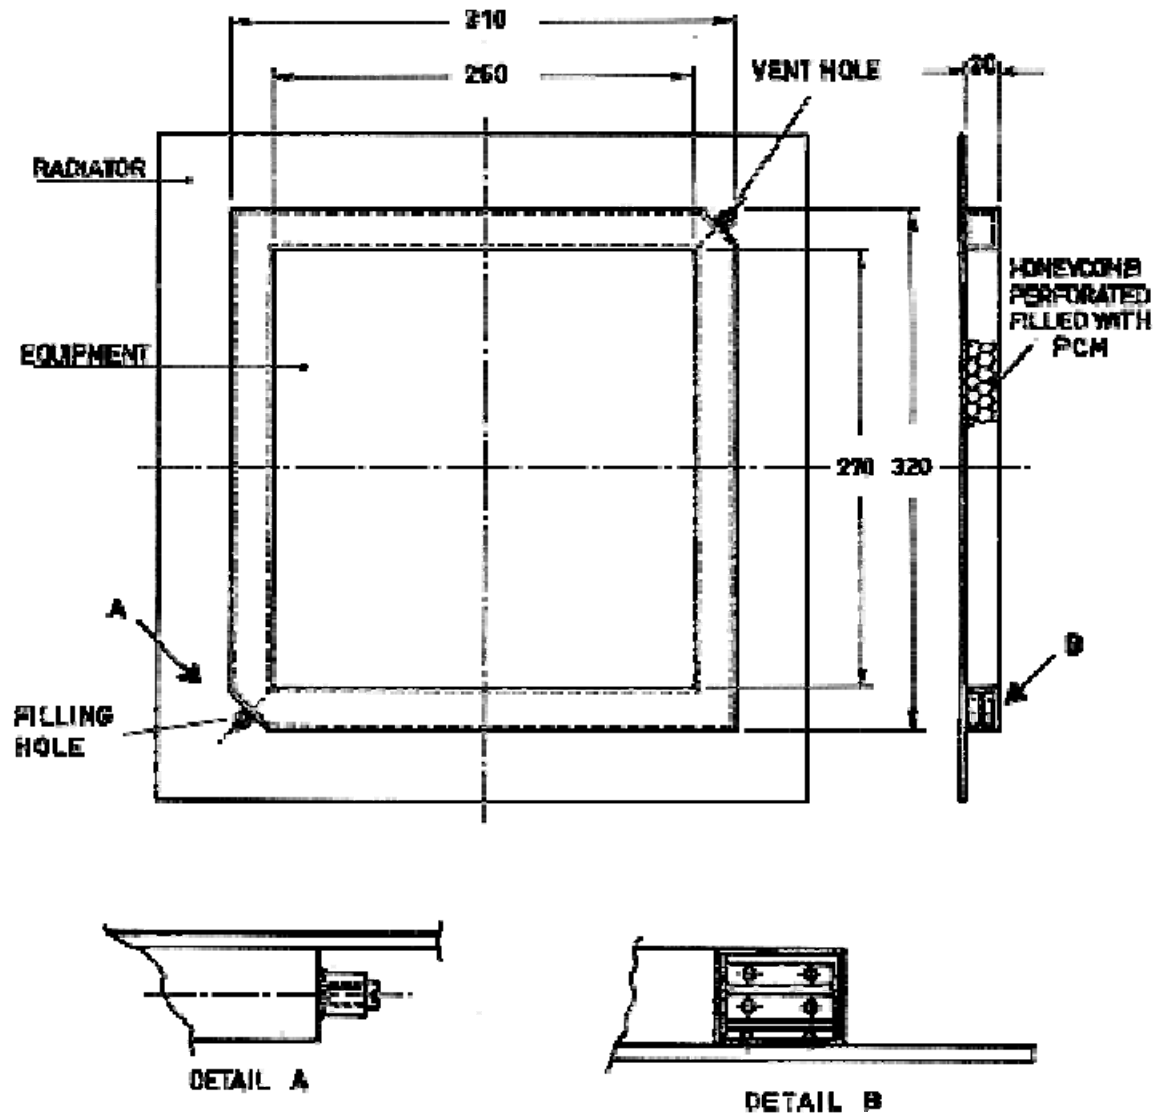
Fully machined container with welded top. Honeycomb filler. All the dimensions are in mm. From DORNIER SYSTEM (1972) [10].
